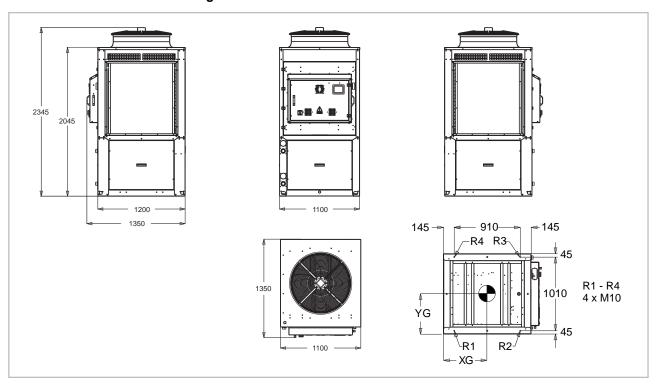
Dimensions of KWP 460-600 Eco without storage tank (all measurements in mm)
